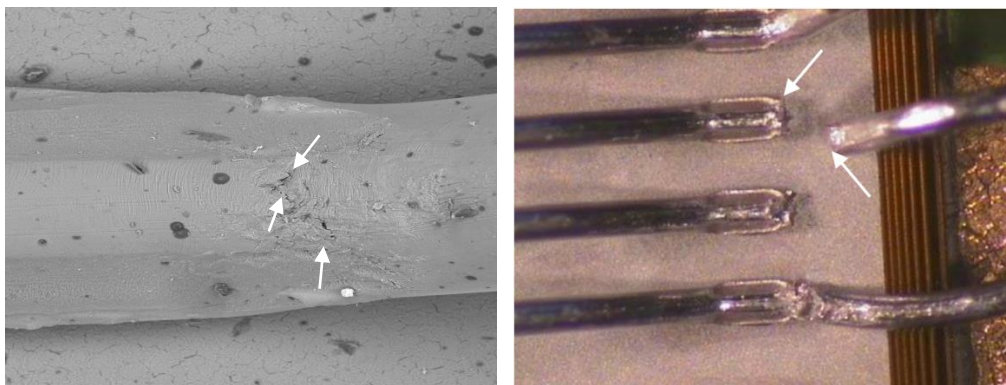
Heel crack in heavy Al wire bonding 1) SEM image of observed heel crack after active power cycling 2) Heel crack through bonded wires [34]
